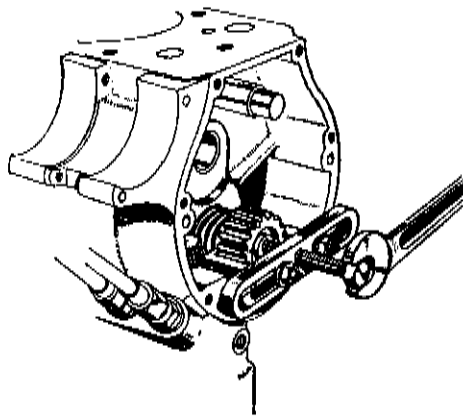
Engine shaft pinion extractor (Service Tool 61-1735)
